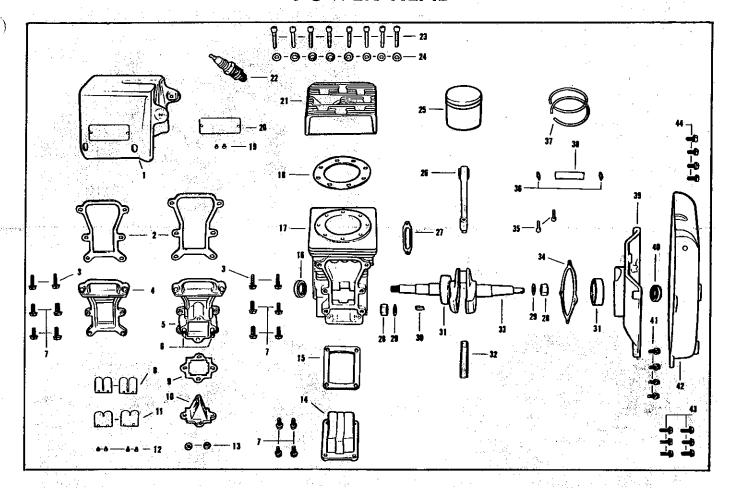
EXPLODED VIEW OF POWER HEAD
